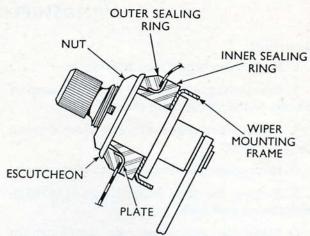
Sectioned view of wiper pivot housing attachment to scuttle
